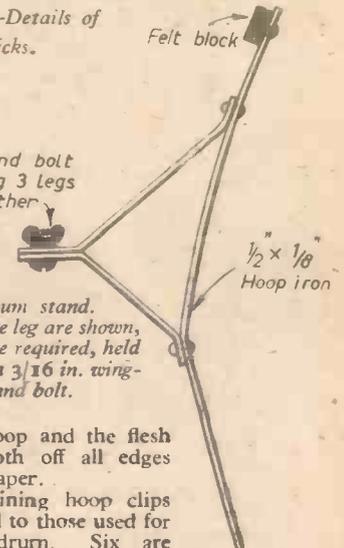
Drum stand. Details of one leg are shown, but three are required, held together by a 3/16 in. wing-nut and bolt.
